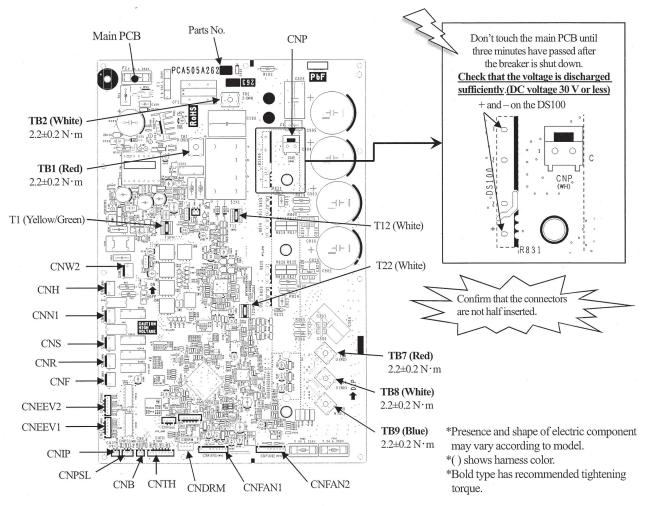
Parts arrangement view of main PCB and voltage measurement points
